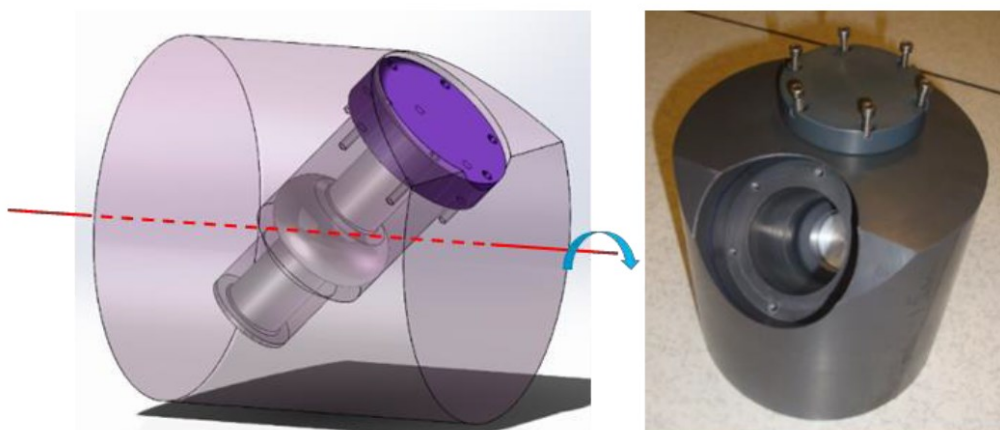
3D drawing and picture of a rotatranslator tumbler
